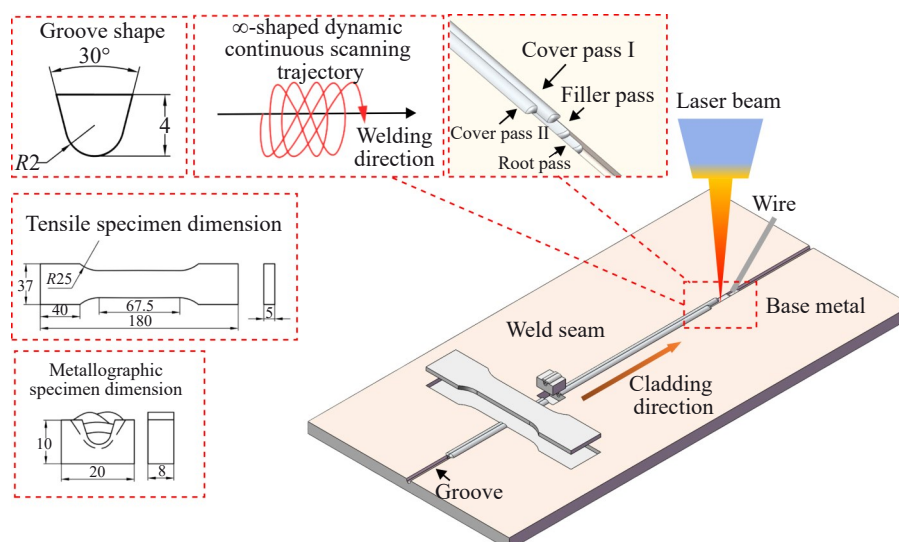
Schematic diagrams of simulated weld bead, groove shape, sampling positions, and dimensions of tensile and metallographic specimen
